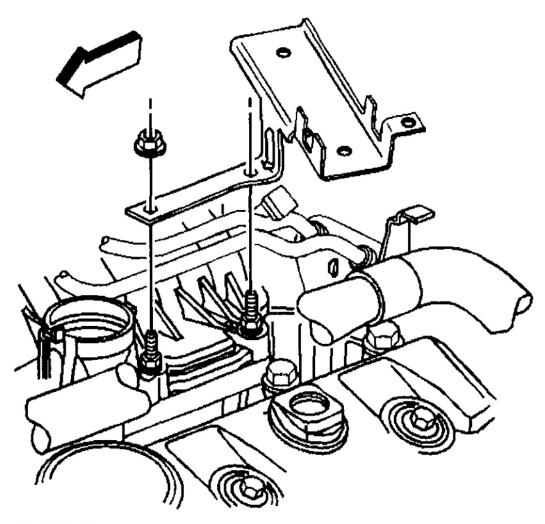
Ignition Coil, Ignition Coil Driver, Ground Nut/Cable & Generator Electrical Connectors Courtesy of GENERAL MOTORS CORP.
